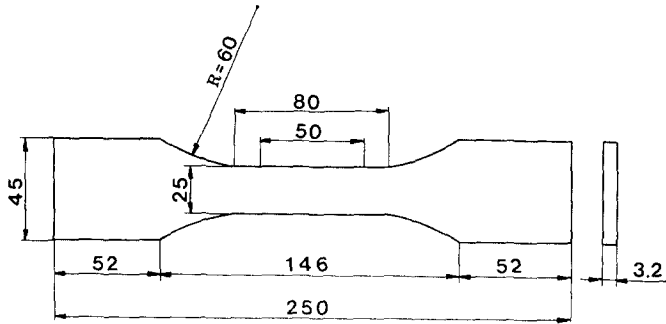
Dimension of specimen for tensile test.(JIS K 7054)
